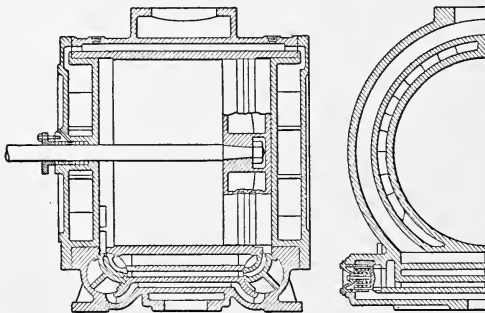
Air Cylinder Construction of Wheeler Dry-vacuum Pump.
